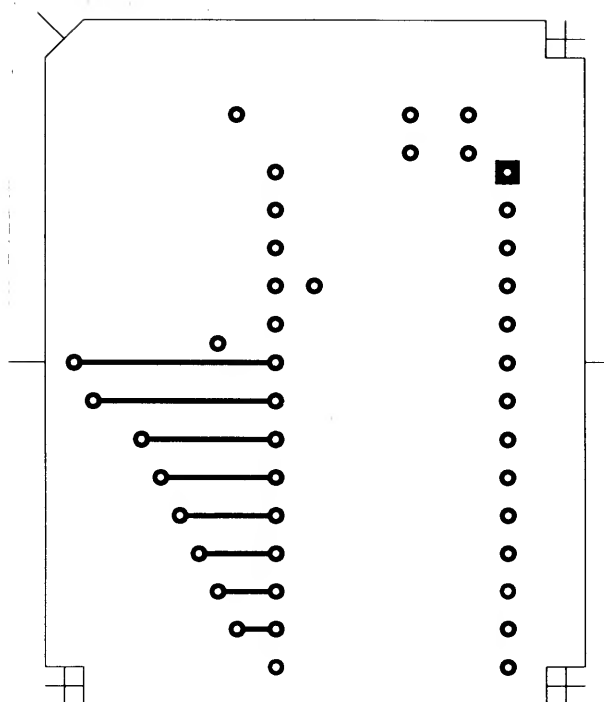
PCB Solder Side Layout Pattern Using Surface Mounted PLCC
